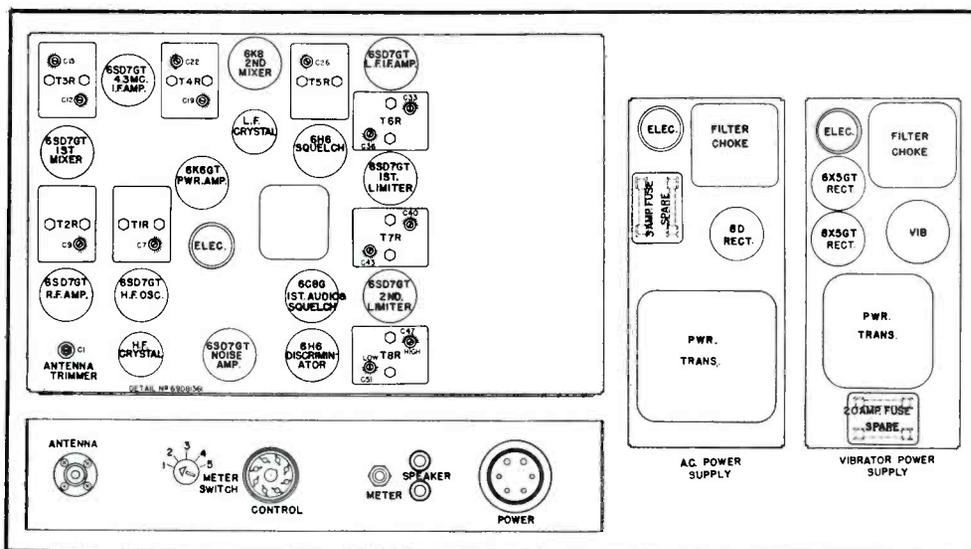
CHASSIS LAYOUTS OF THE RECEIVER AND THE TWO POWER SUPPLY UNITS
